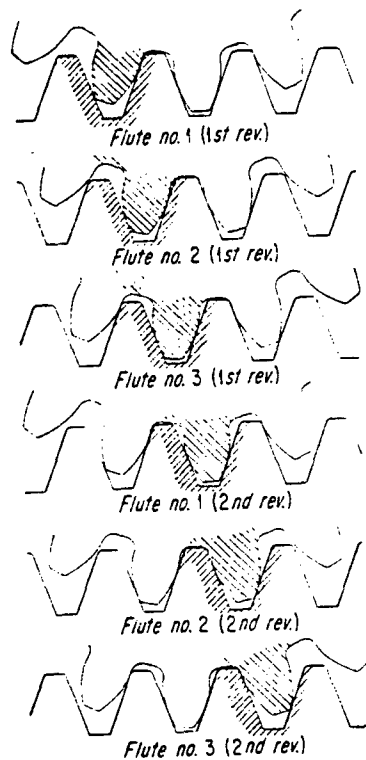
How Different Hob Flutes Form the Gear Tooth (4)
